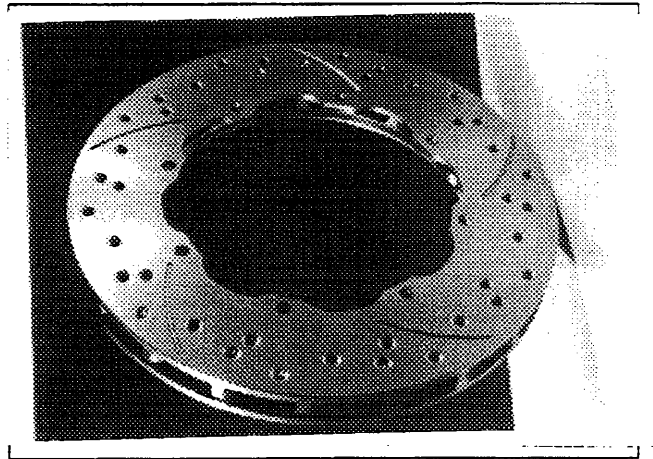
FRONT AND/OR REAR BRAKE DISC
